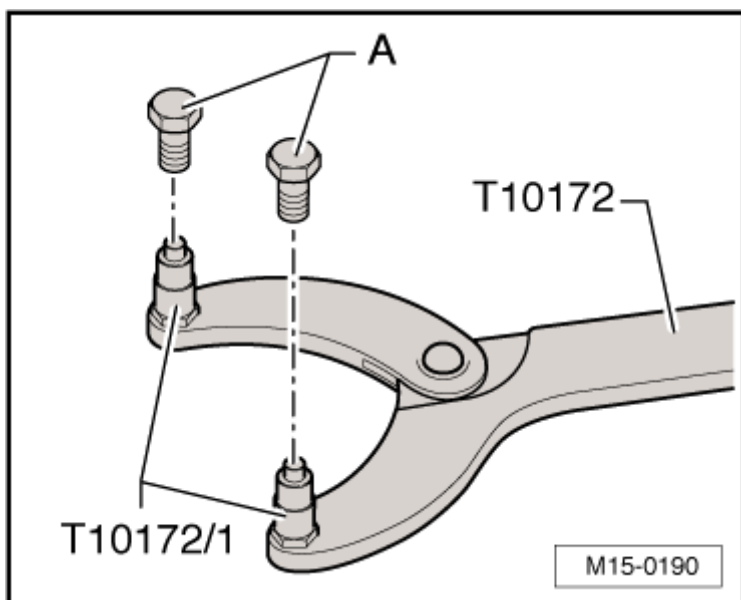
Identifying Bolts Attached To Adapter T10172/1 For Installation
